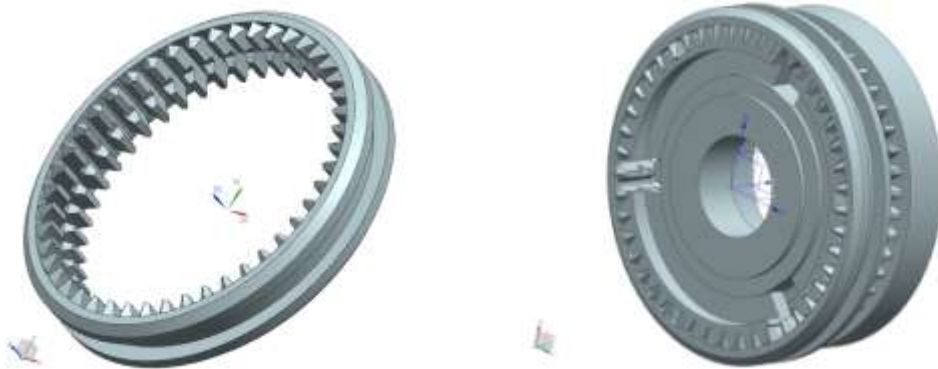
Parameterized 3D model of joint Fig.6 Synchronizer assembly model
